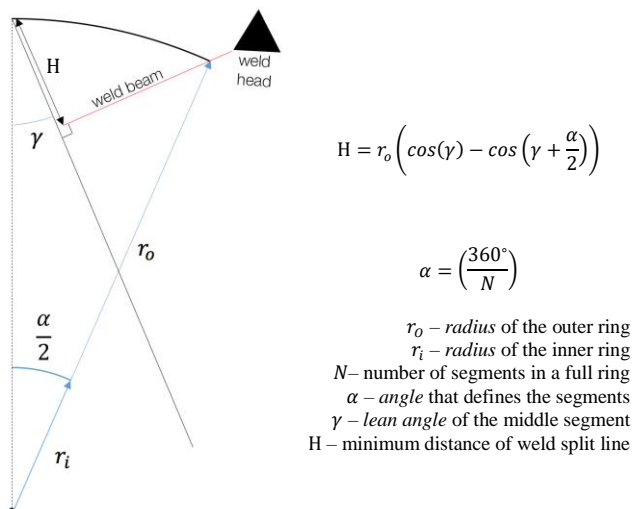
Principle design sketch showing the interplay of a TRS segment and a weld beam.
